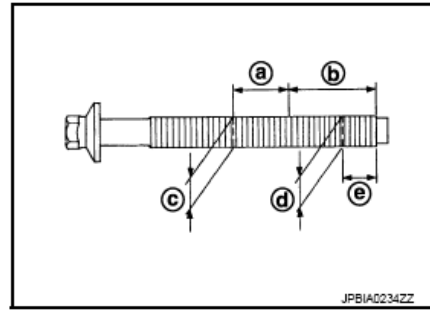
Measuring Lower Cylinder Block Bolt Outer Diameters
